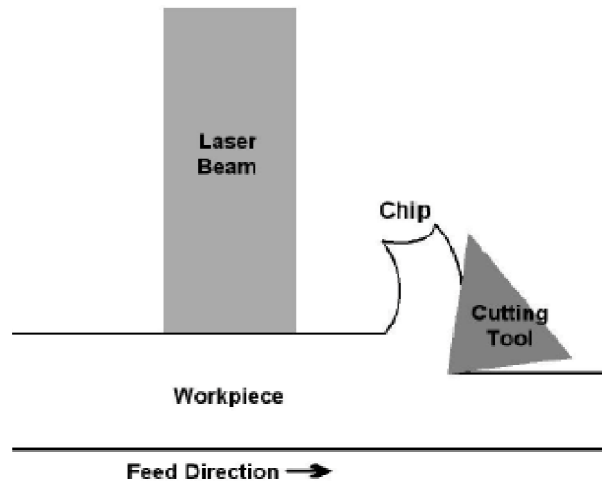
Laser Assisted Machining (LAM) Principle [10]
